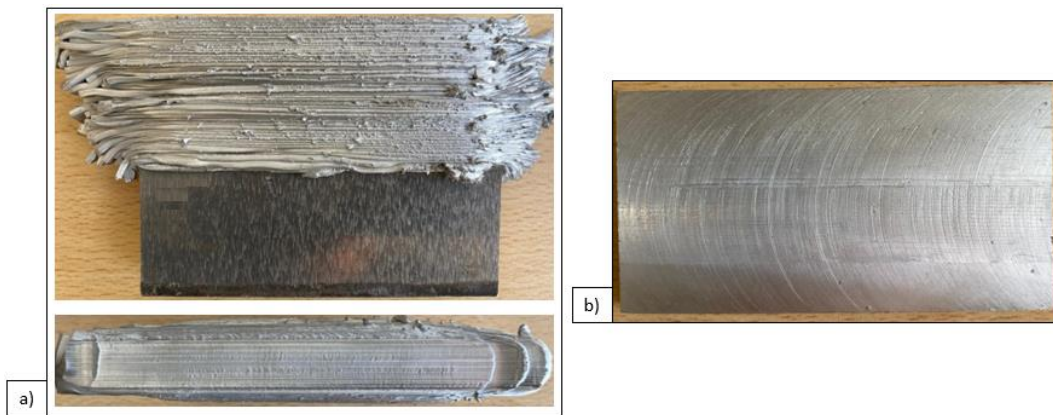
TP9 test conducted a) before machining; b) after machining.
